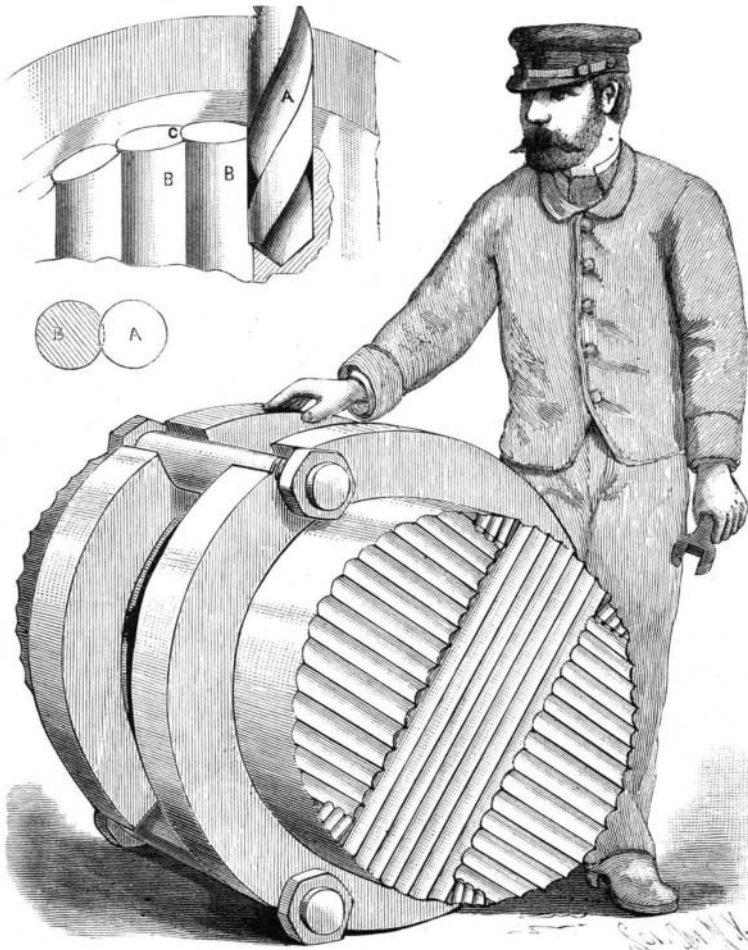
STEAMER UMBRIA—SHOWING THE DRILL CUTS IN SHAFT SECTION.
